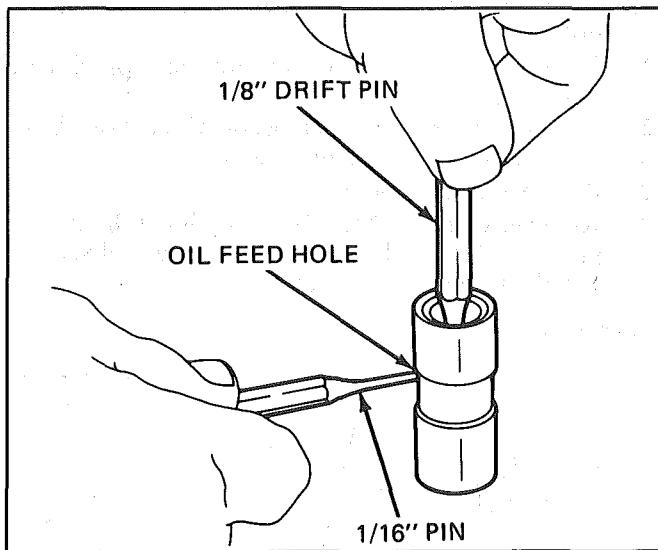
A3-14 Assembling Hydraulic Lifter Typical
